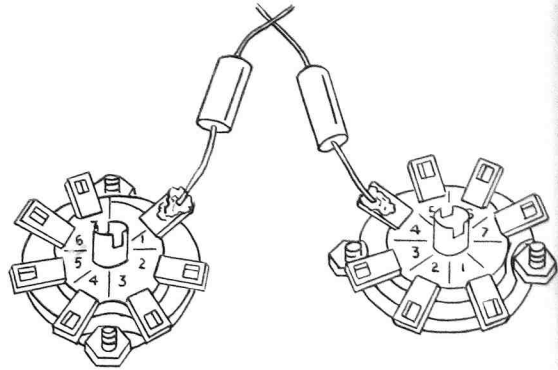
After resistors are soldered to tube sockets, leads between resistor body and lugs may be bent so the free leads press lightly but firmly against each other without being held in place with pliers. Again you have both hands free for soldering.
